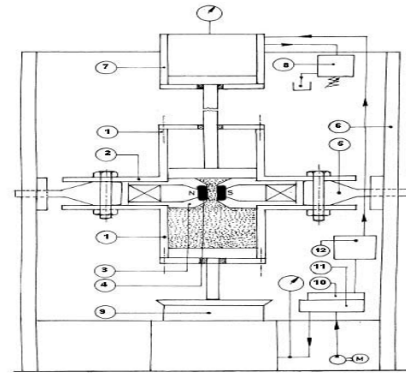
Schematic illustration of the MFAAFM setup: 1 Cylinder Containing Media; 2 Flange; 3 Nylon Fixture; 4 Workpiece; 5 Eye Bolt; 6 Hydraulic Press; 7 Auxiliary Cylinder; 8 Modular Relief Valve; 9 Piston of Hydraulic Press; 10 Directional Control Valve; 11 & 12 Manifold Blocks; 13 Electromagnet.
